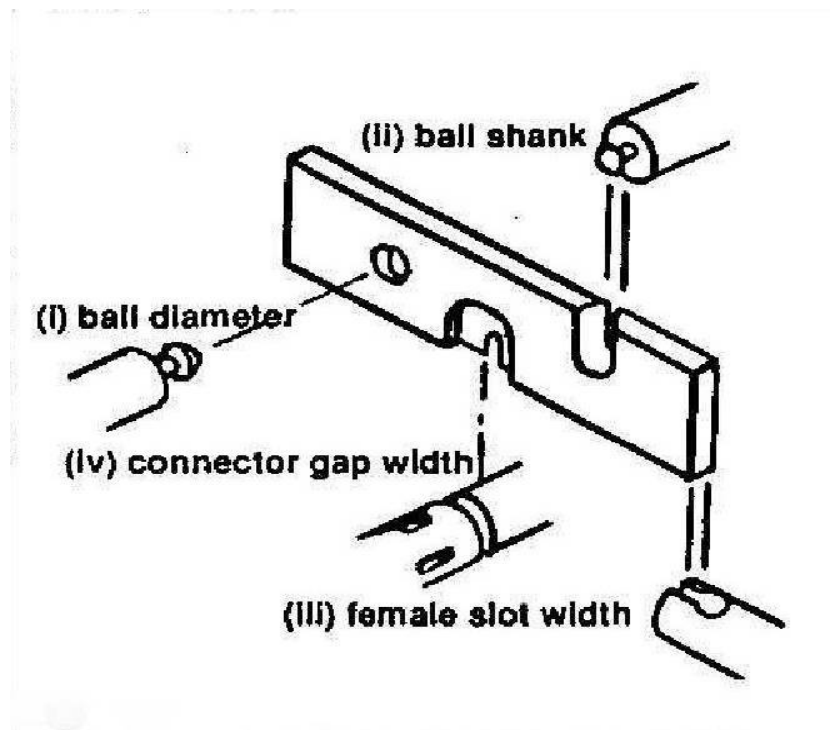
Verification of pigtail dimensions by Go- NOGO Gauge
